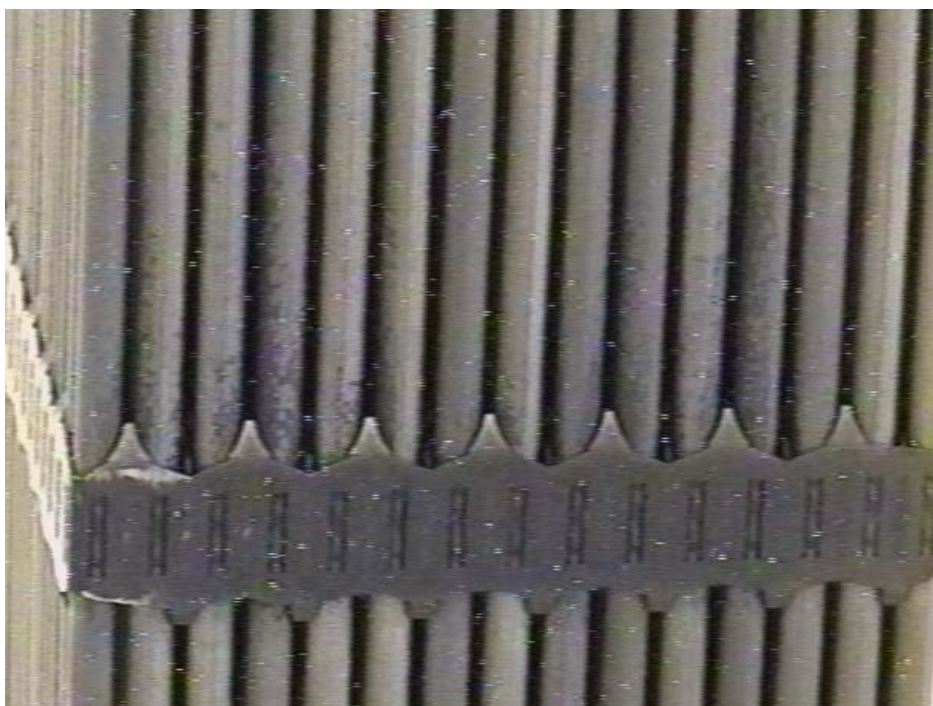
Fuel assembly T-07 at sixth grid spacer.
